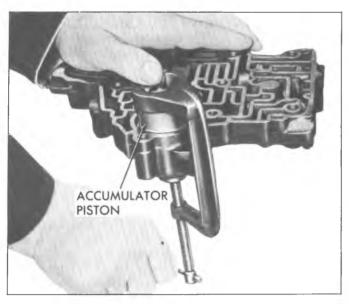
B—Installing Compressor Tool to Front Accumulator Piston
